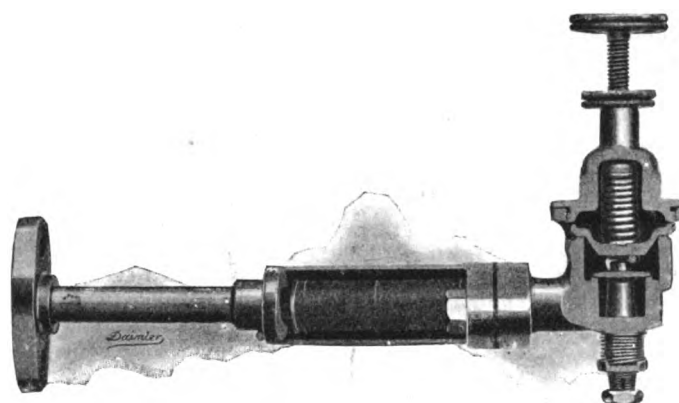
SECTIONAL VIEW OF PRESSURE-REGULATING VALVE.
